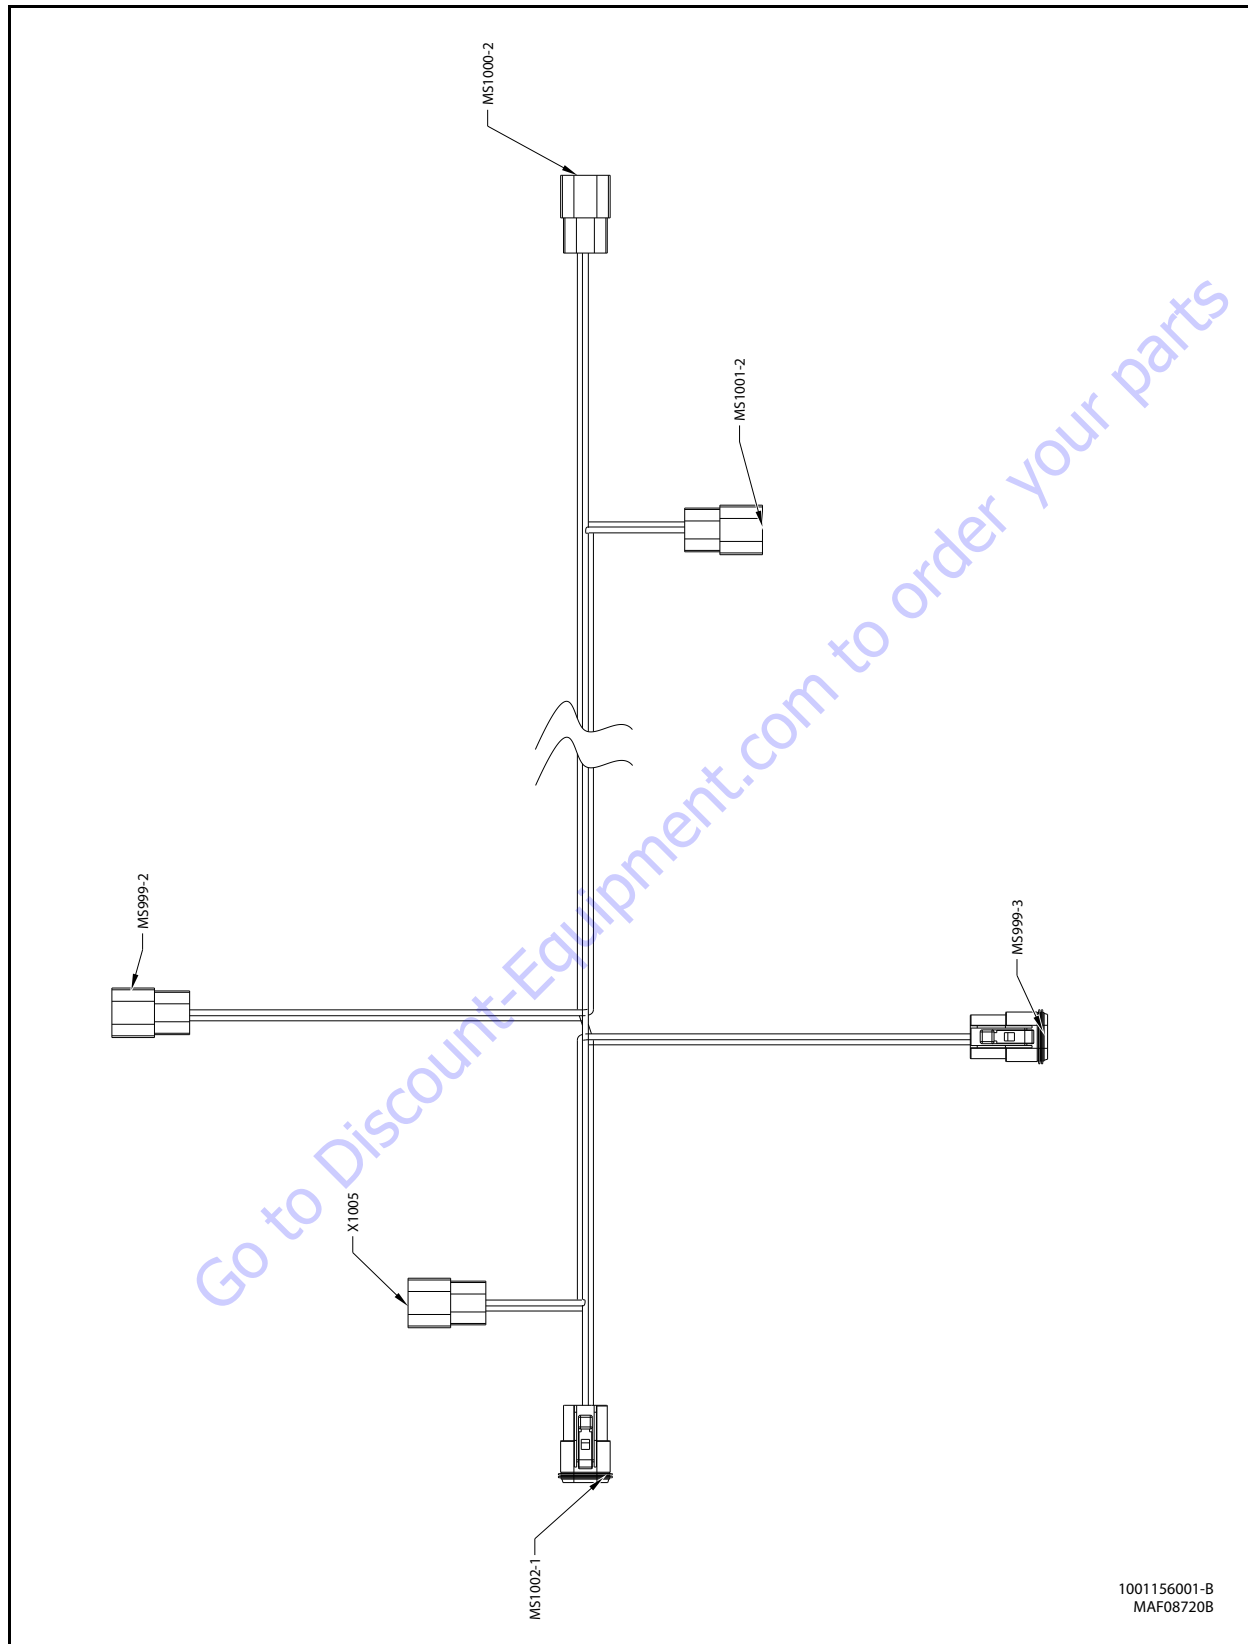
CAN Engine Harness - Sheet 1 of 2
